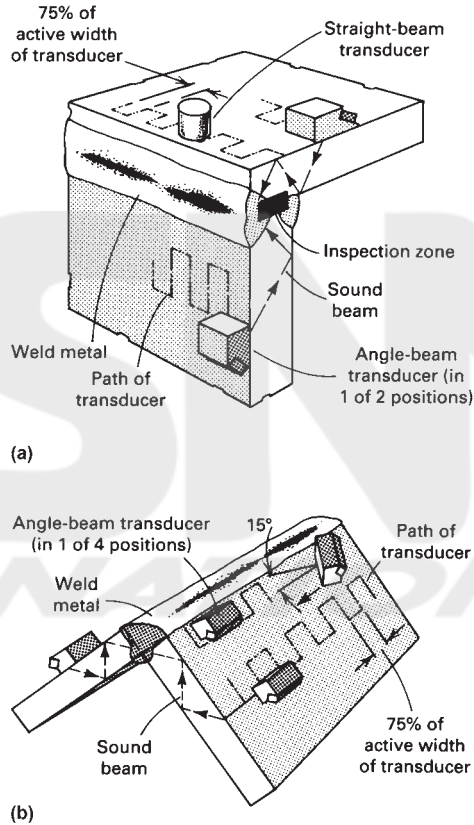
Ultrasonic scanning procedure for full penetration groove weld (a) and double fillet welds (b) in corner joints. Source: Ref 1
